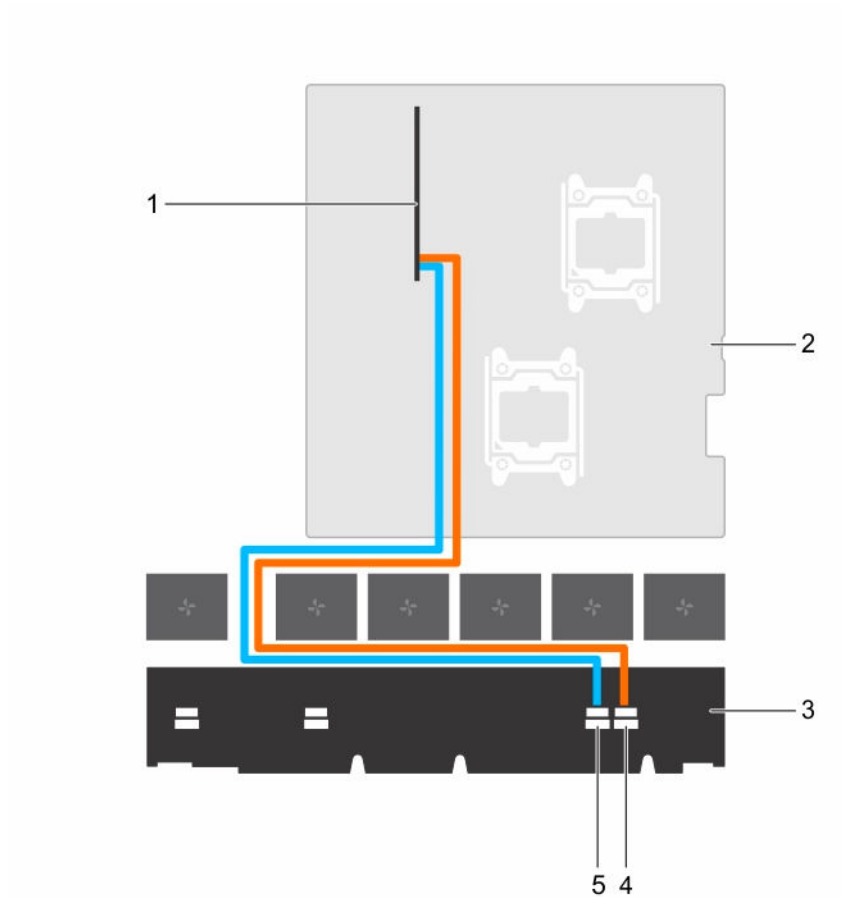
The figure shows cabling between the hard drive backplane and RAID controller card without any riser modules.
